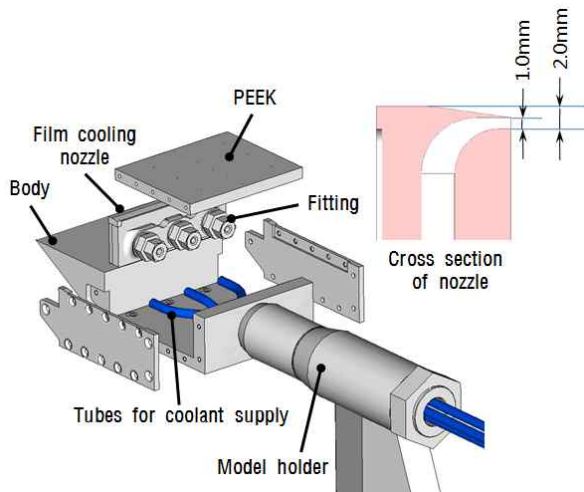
Exploded view of the film cooling test model with detailed geometry of injection nozzle
